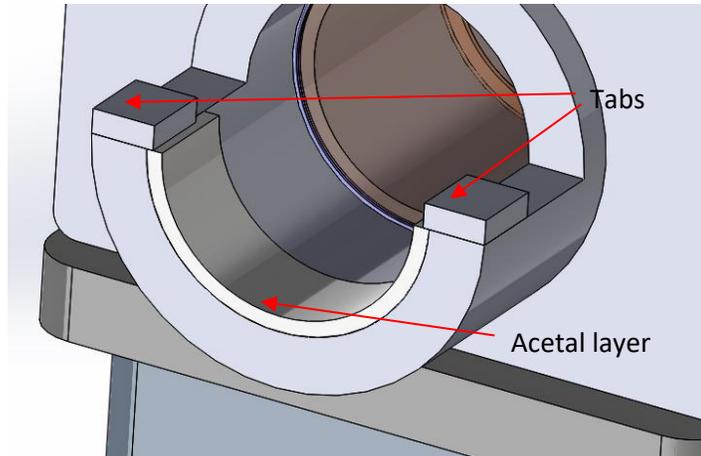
Illustration of Acetal Layer Held in the Housing Cup with Tabs, Shaft Housing
